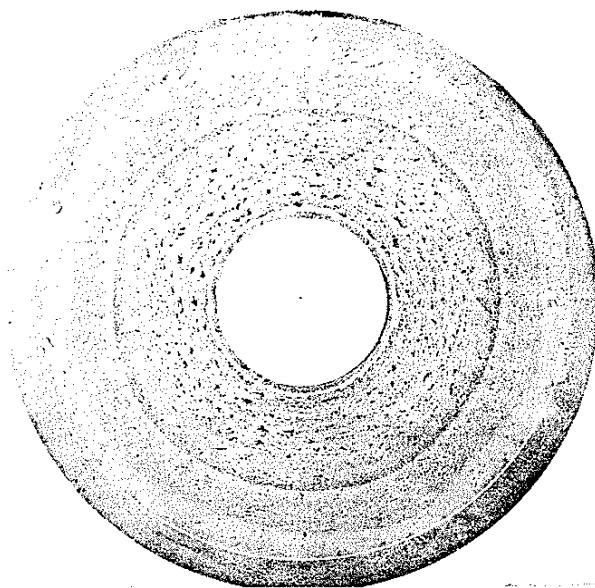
Macro-etched Section of Centrifugal Casting for Gun Tube. (Obvious segregation present)
